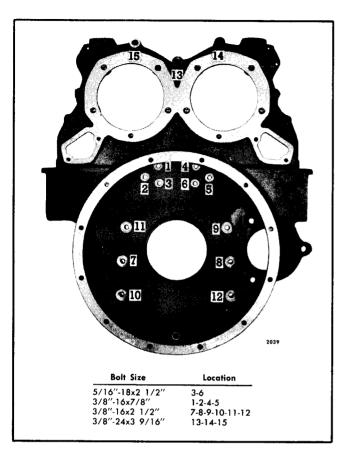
Flywheel Housing Bolt Sizes and Tightening Sequence (Operation 1)––In–Line Engine
